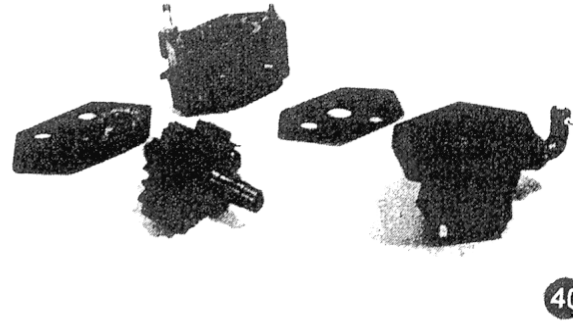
Oil pump parts (viewing these from left to right) front end plate, gears and shaft, portion of main oil pump body, central plate and valve gear scavenge body.
